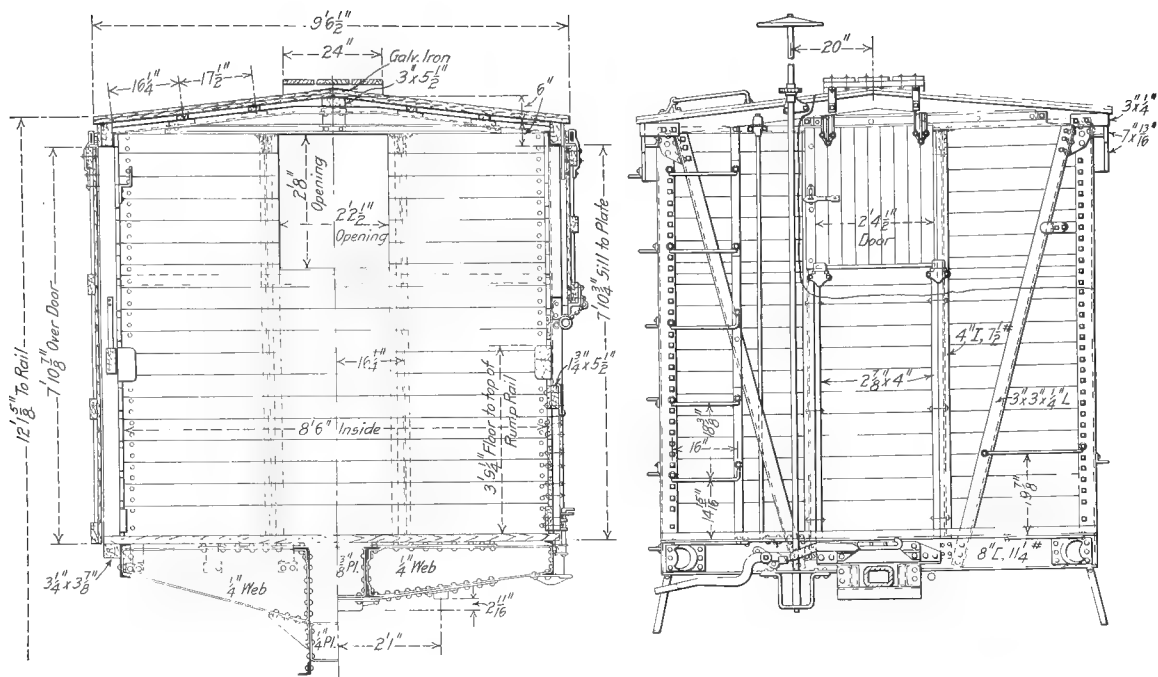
Cross Sections and End Elevation of Missouri Pacific Steel Frame Stock Car Shown in Fig. 344.
